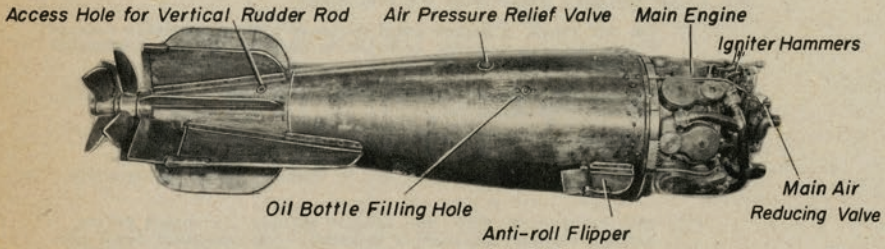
Torpedo Type 91 Mod 3, Afterbody, Starboard Side
